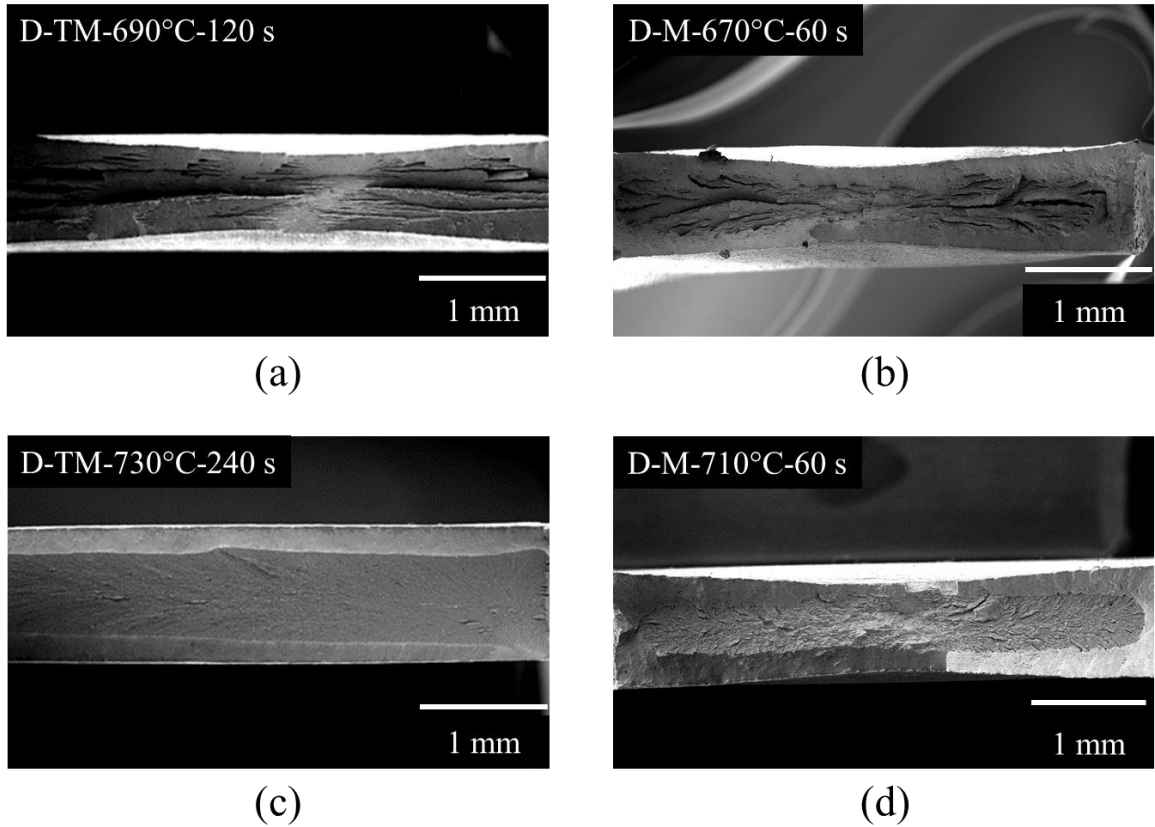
Fracture surfaces of (a) TM-690-240; (b) M-670-120; (c) TM-730-240 and (d) M-710-60.
